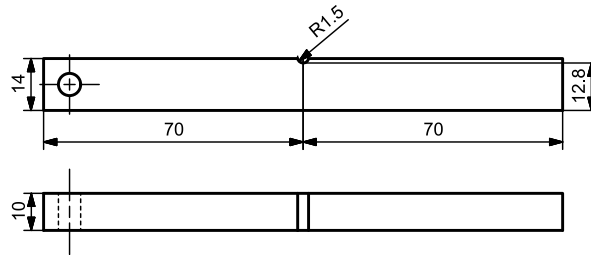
As-machined specimen geometry for TP2. All dimensions are given in millimeters.
